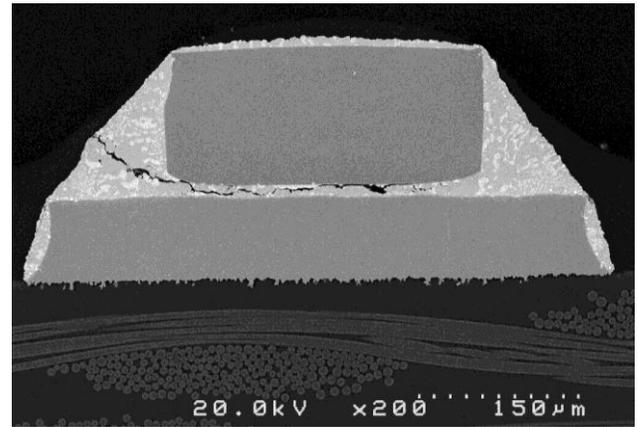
Example of a flexion crack in a BGA ball.
